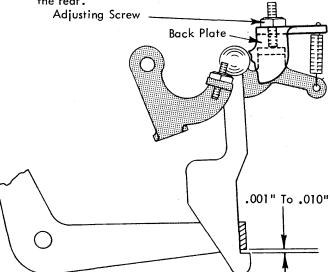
Carrier Return Latch Height Adjustment (11 Inch Machine)
